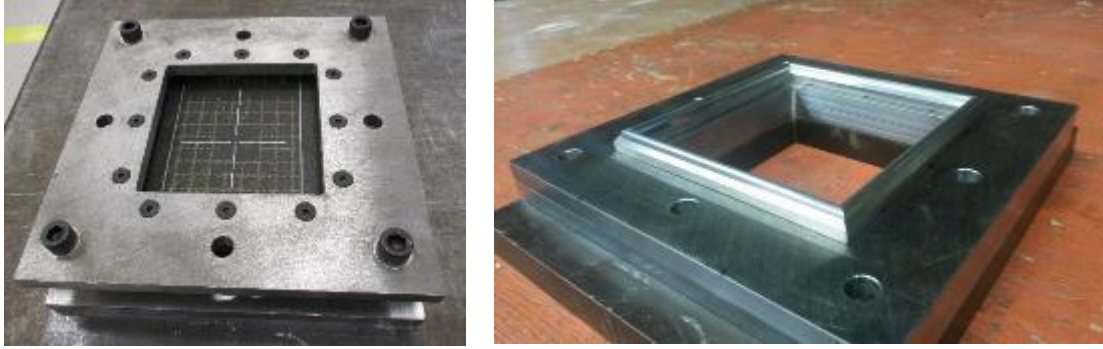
Test fixture with rounded support edges to clamp the specimens during impact.
